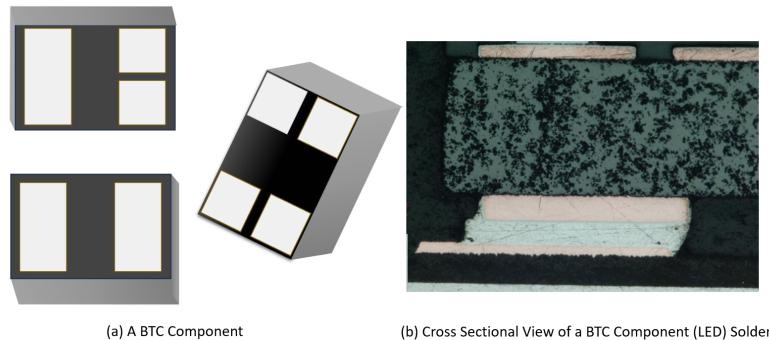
(a) A Bottom Terminated Component (LED) with different pad designs (b) A BTC Component Cross-sectional Solder View from [16]
